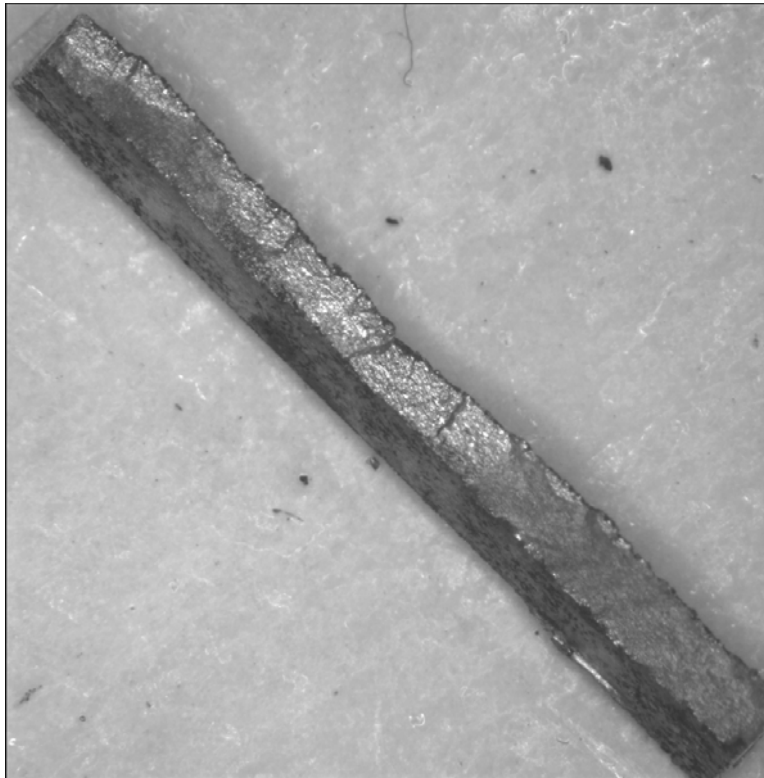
Fracture Surface of Specimen 5914.
